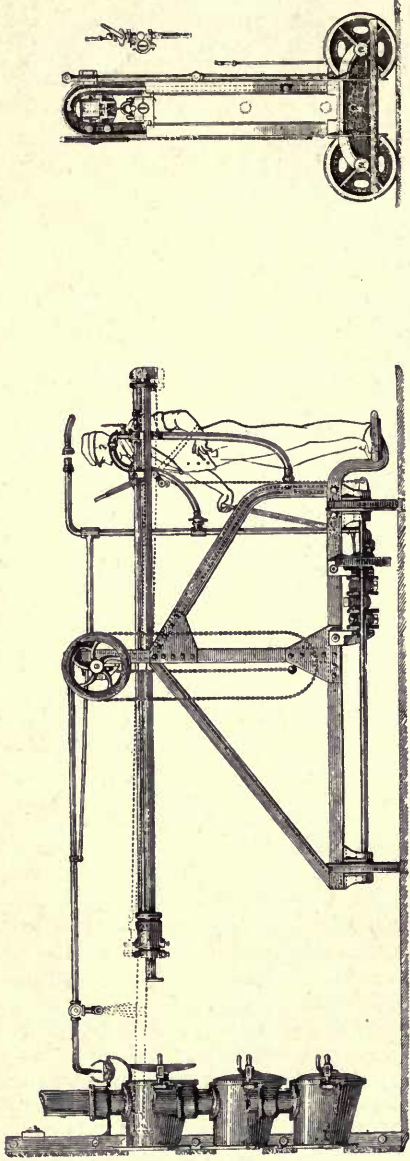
FOULIS-WOODWARD HYDRAULIC DRAWING MACHINE.
